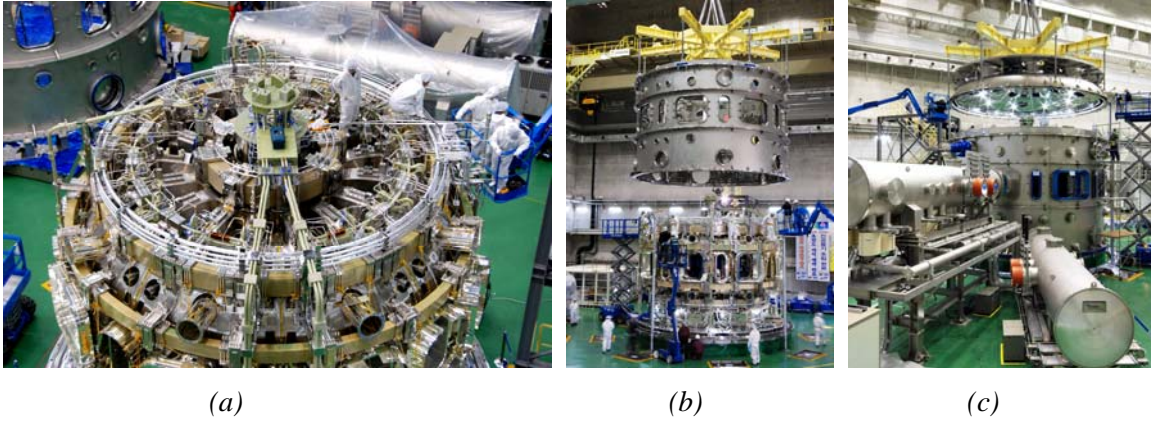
KSTAR Assemblies in 2007 (a) Final Inspection for the PF coils and In-cryostat components (b) assembly of the cryostat cylinder (c) assembly of the cryostat lid
